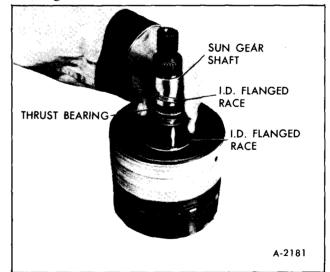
Installing Thrust Bearing over Sun Gear Shaft
